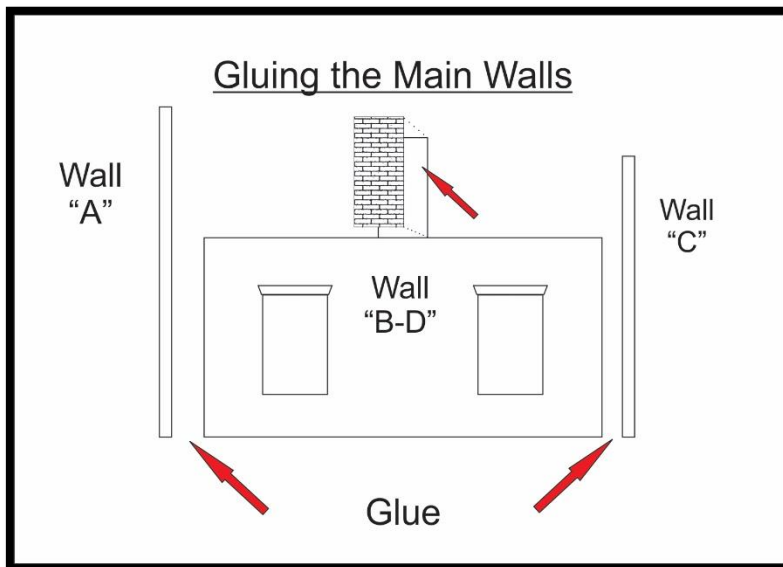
GLUING YOUR STRUCTURE WALLS
